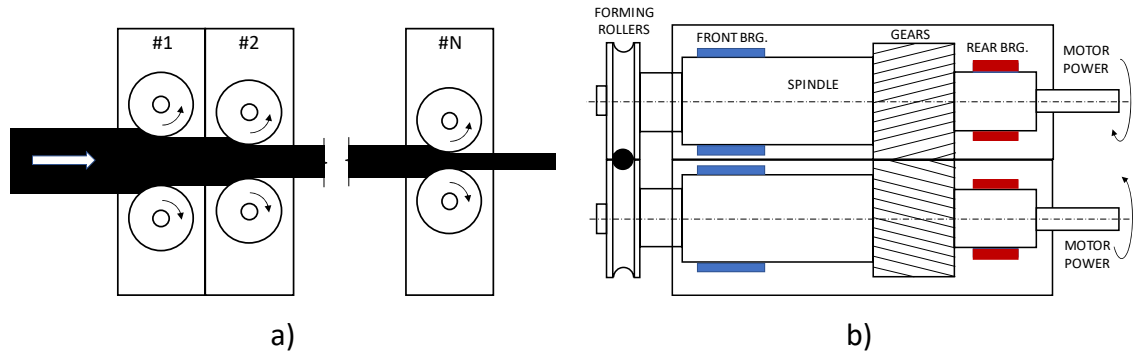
a) Example of a steel roll forming machine and b) arrangement of each stand.
